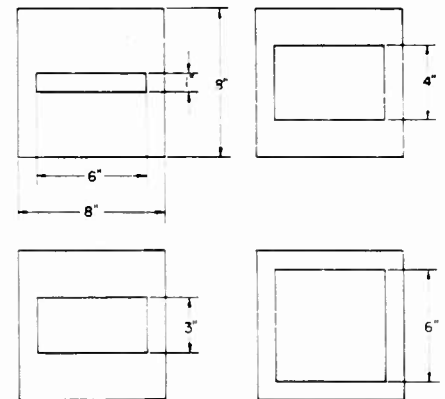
Cavity mouth inserts for the test section shown in Fig. 2
